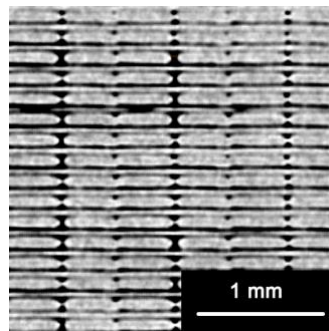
Longitudinal cross-section of a cylindrical specimen (0.08 mm LH x 0.42 mm LW) illustrating pore morphology in 3D printed specimens considered in this study. Light areas: beads, black areas: pores.
